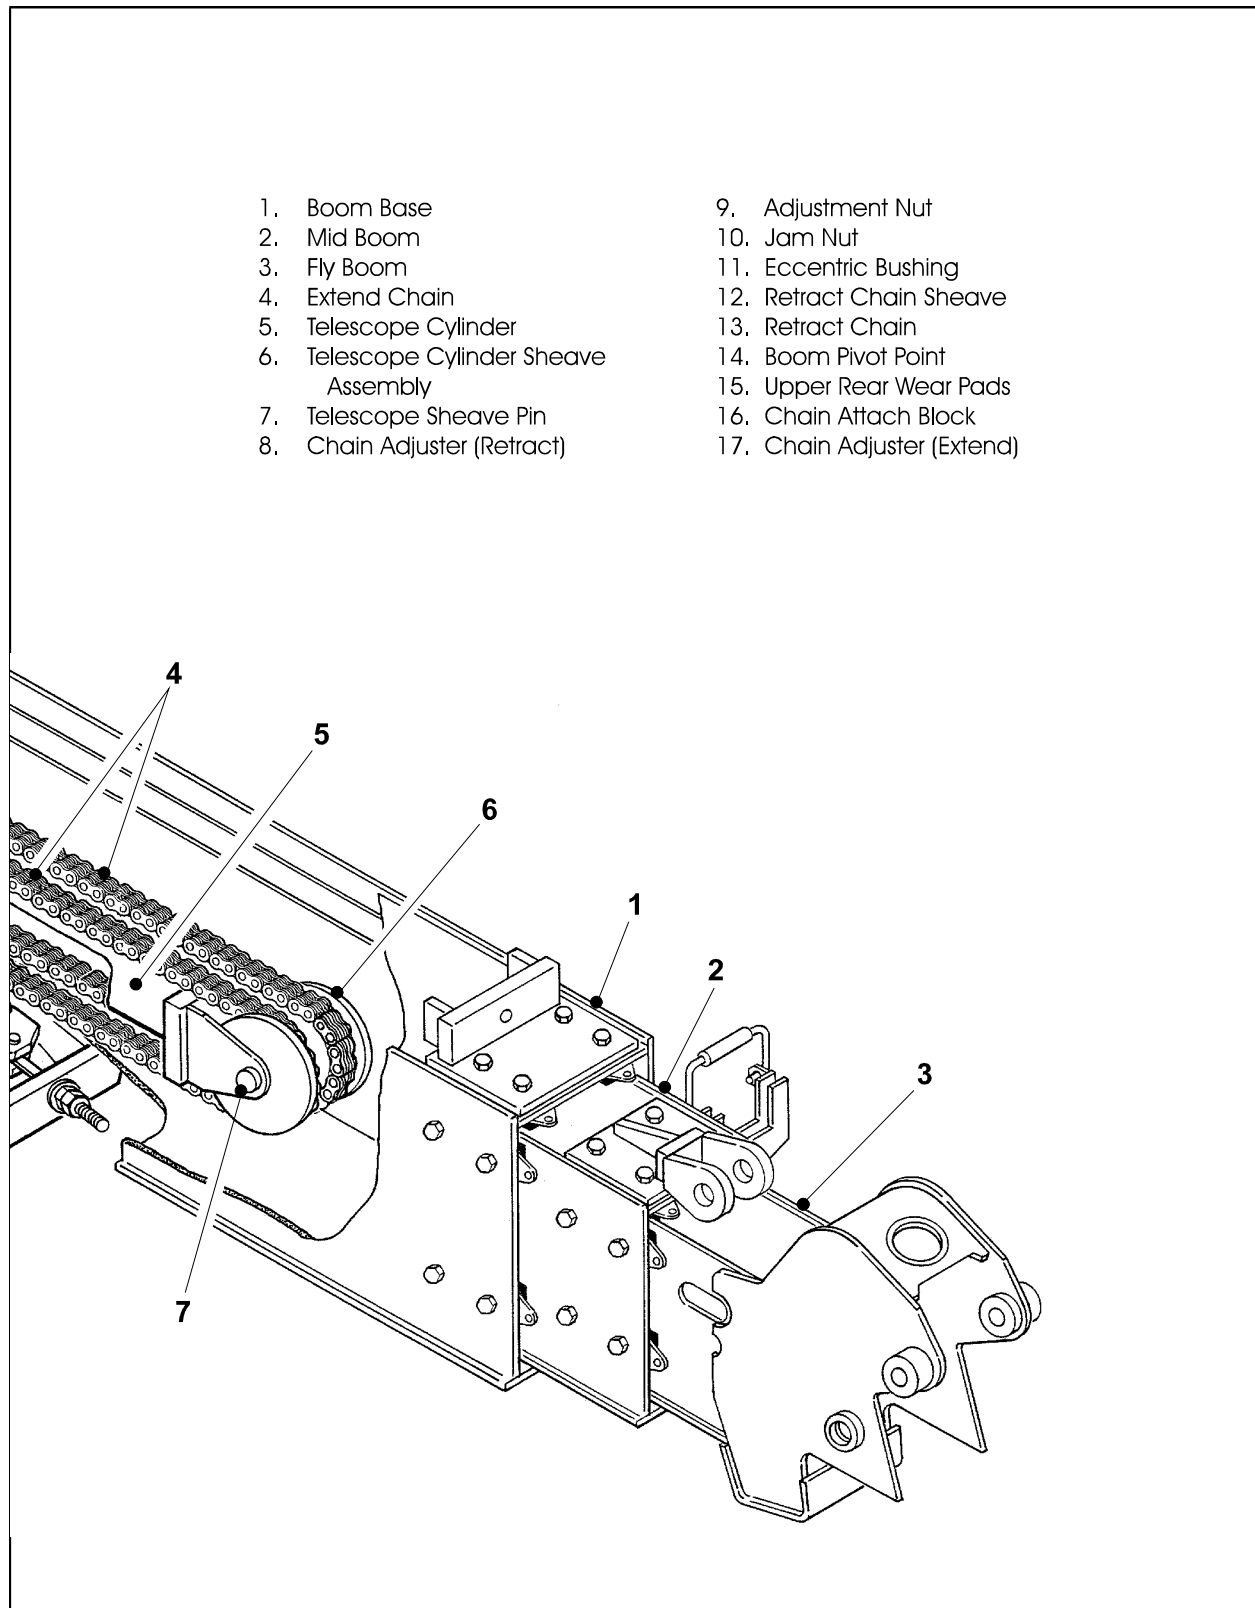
Boom Assembly (Sheet 1 of 2)
